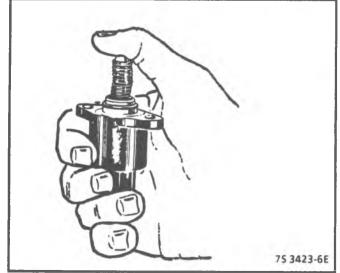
Adjusting Valve Pintle - Flange Type
